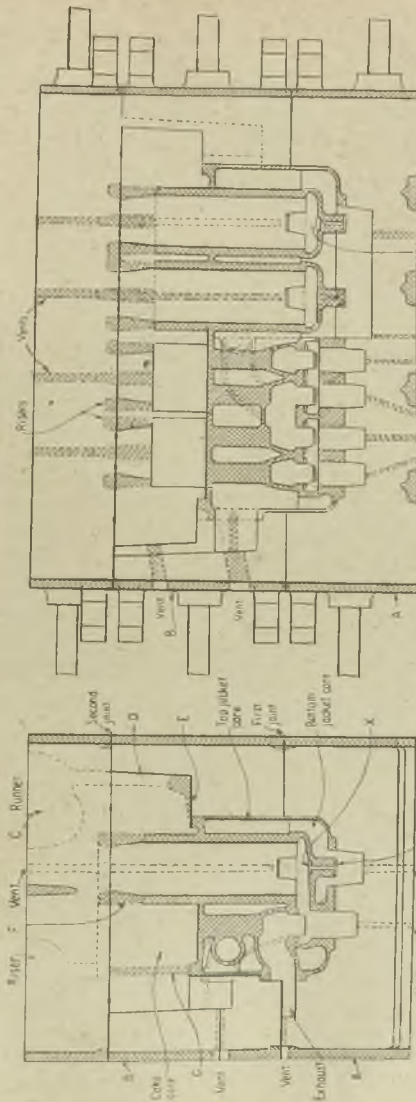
LONGITUDINAL AND CROSS SECTION OF THE MOULD FOR CYLINDER SHOWN IN FIG. 22.
